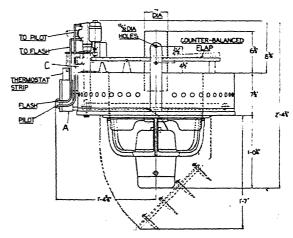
WALL BRACKET MOUNTING OF ELECTRIC HEATER
